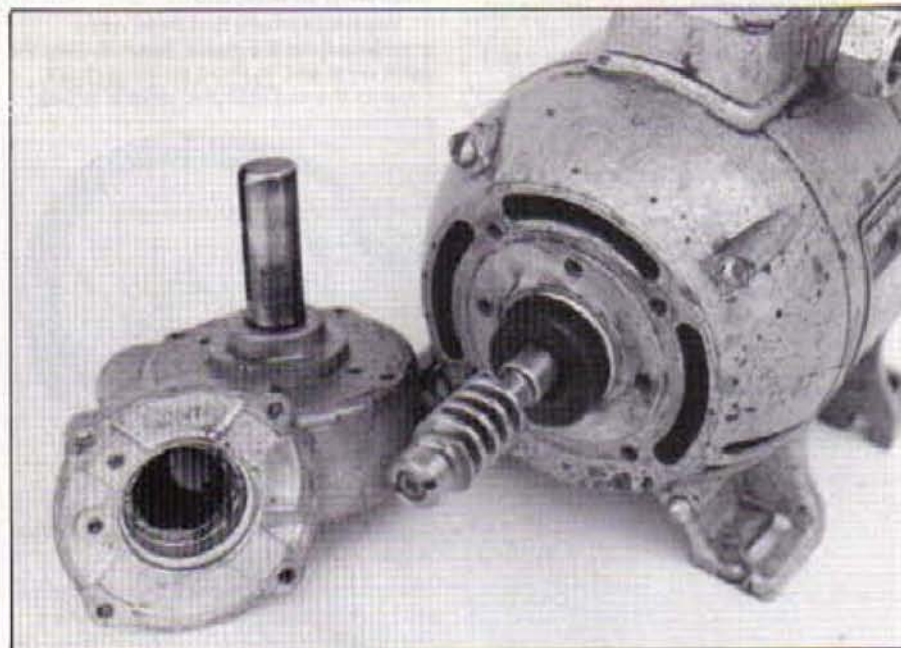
The gearbox of this motor has been removed; the register arrangement can be seen clearly.
